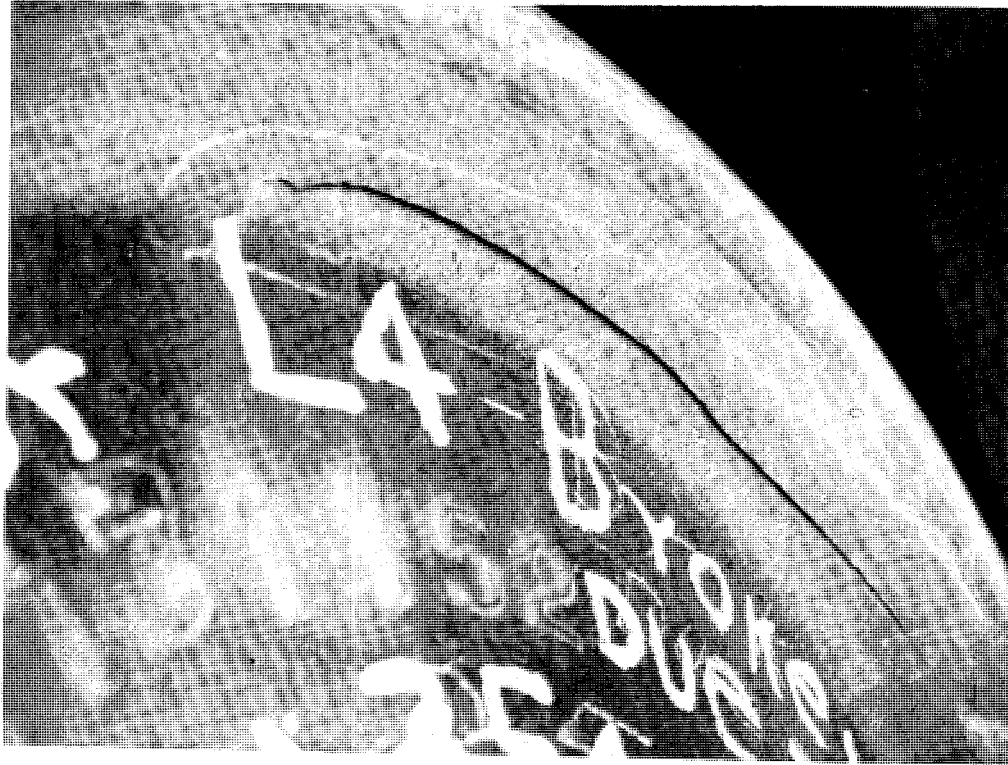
View of Crack in Rim Fillet of Wheel 3B
